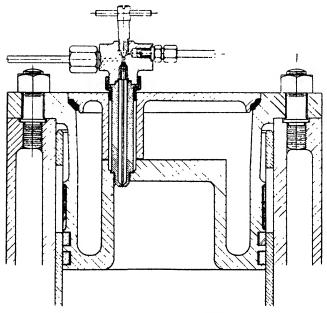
SECTIONAL VIEW THROUGH RICARDO SLEEVE VALVE ENGINE CYLINDER HEAD
